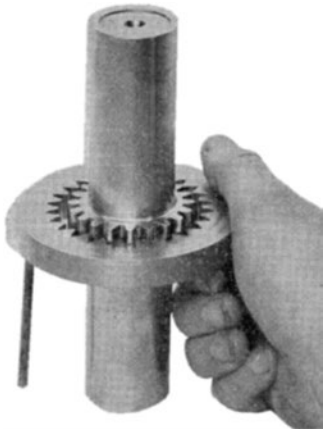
Internal gear of 26 teeth will axially assemble with a 19-tooth pinion. Both parts cut to Table 5.14 proportions.
